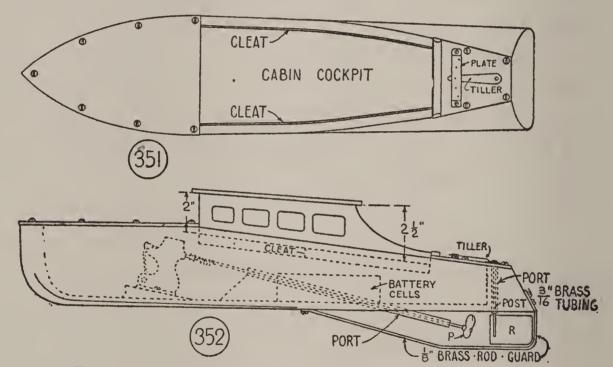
Deck Plan (Cabin Removed). Fig. 352.—Side Elevation of Completed Motor Boat.
